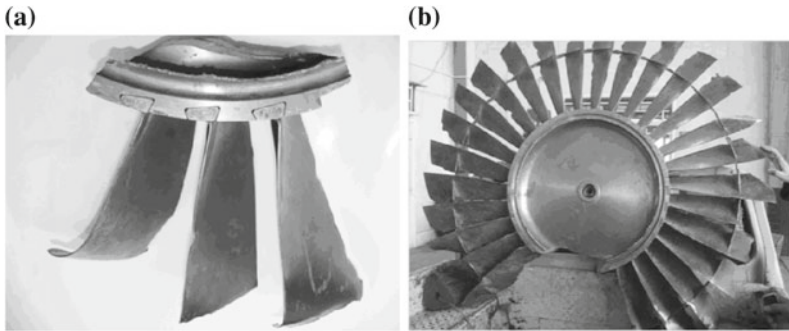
Fracture in disks for compressor of aero engines D30-KU-154
